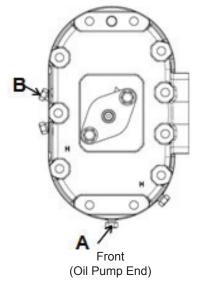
Top view of 3D Discus cylinder head with possible temperature probe locations.
